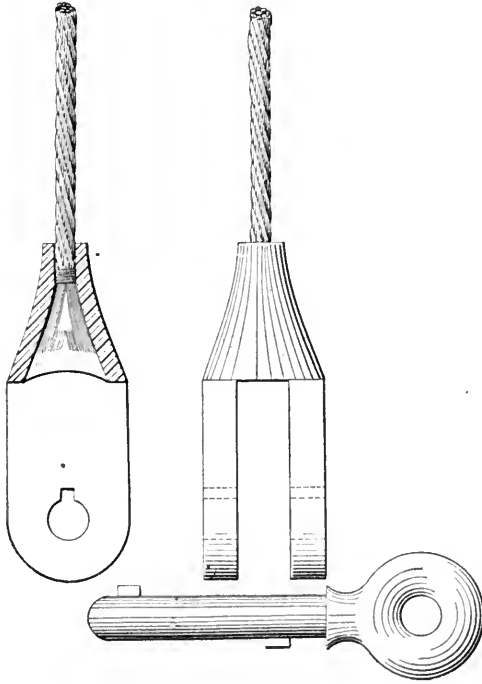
LUG PIN FOR CLEVIS OF BUCKET.
